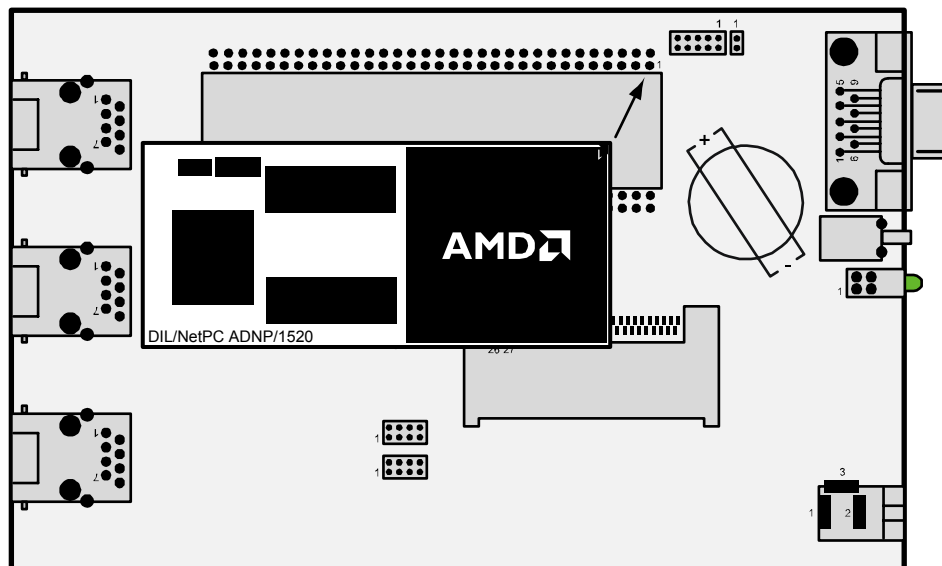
Mounting the ADNP/1520 DIL/NetPC
